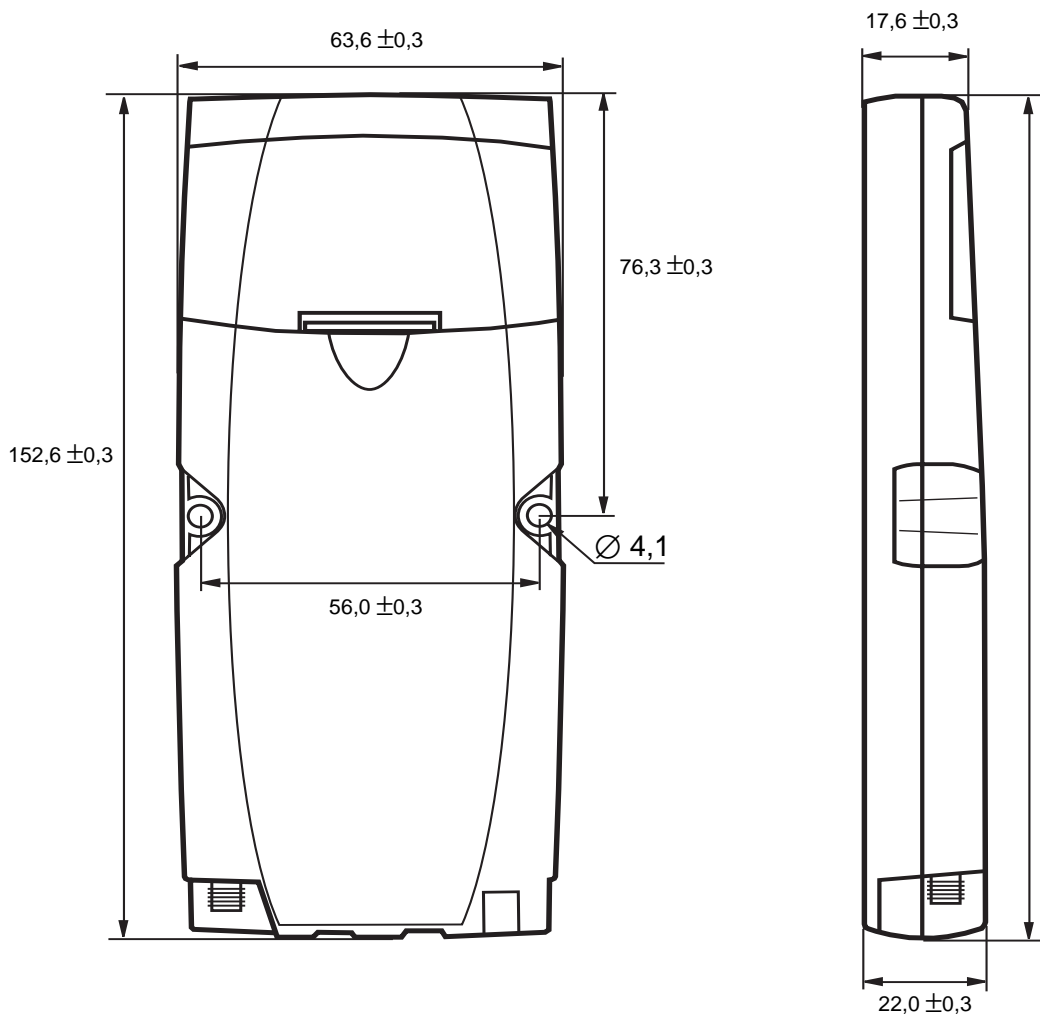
GM 12. Plan and side view with dimensions in millimetres.
